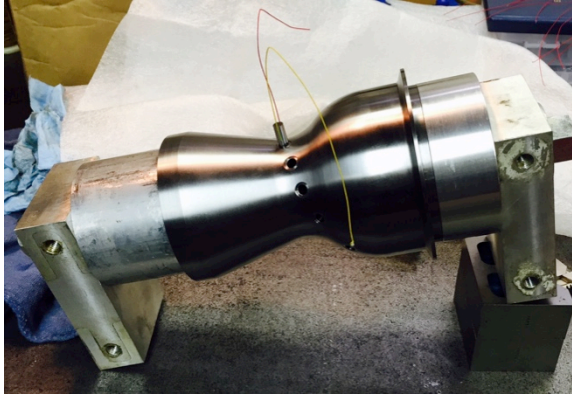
Trunnion assembly used to fixture nozzle during plug installation. Various blocks were used to prop the nozzle at each angle for installing the thermocouple plugs
